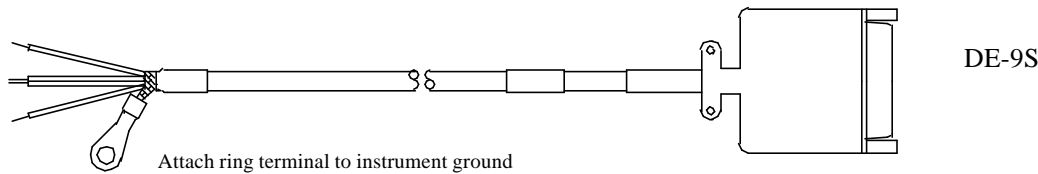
, Model 450 to Scanner/Keyboard Adapter Cable
